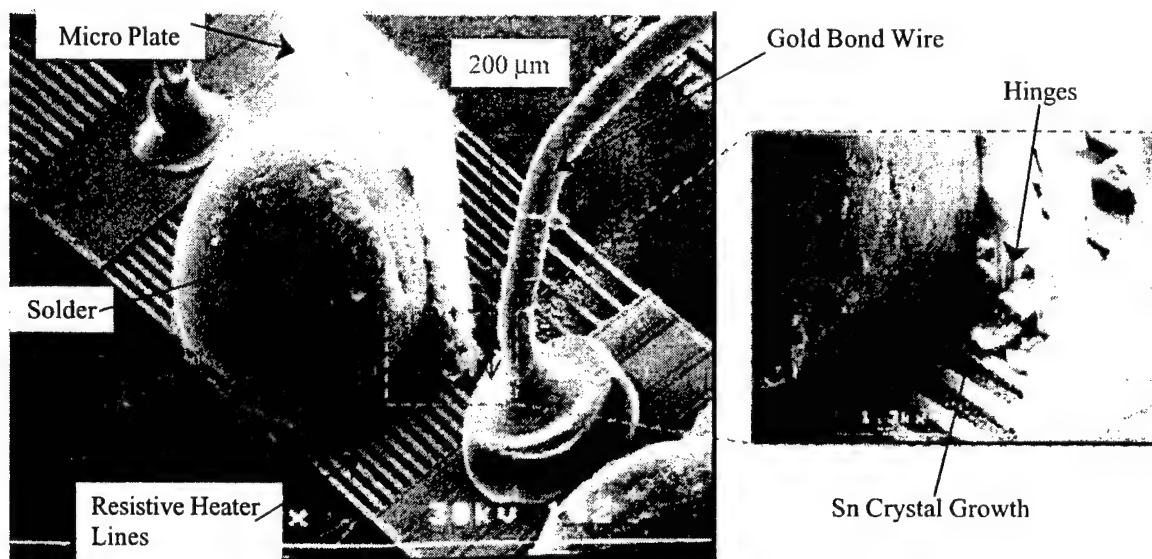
Solder self-assembled plate heated to solder melting point using integrated polysilicon resistive heater lines.
